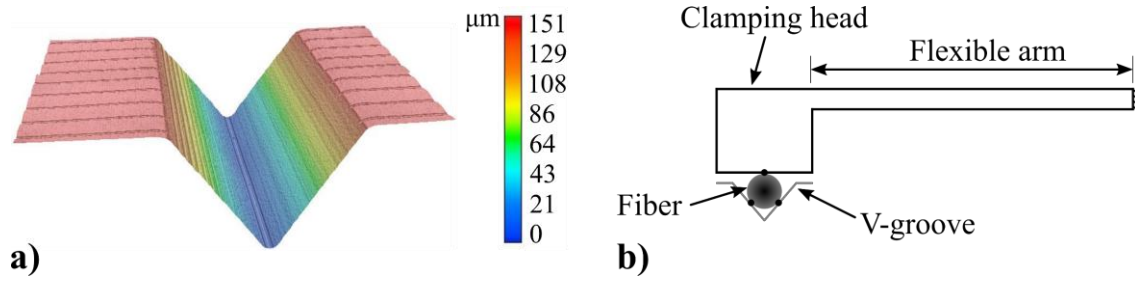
a) A height profile of the laser manufactured v-groove. b) A cross-sectional view of the flexible clamp.
